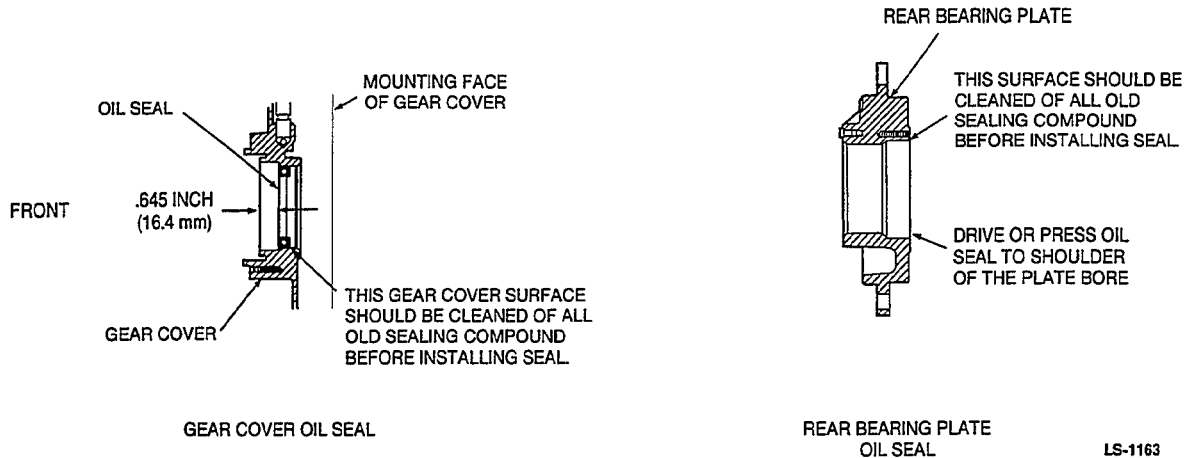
GEAR COVER AND REAR BEARING PLATE OIL SEALS
